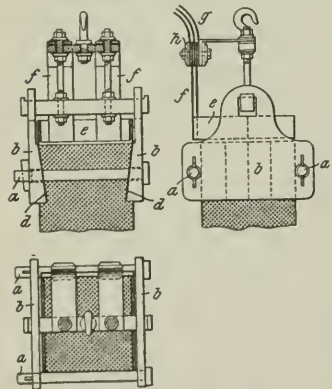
DETAILS OF HOLDER SATISFACTORILY USED IN CARBIDE FURNACE
